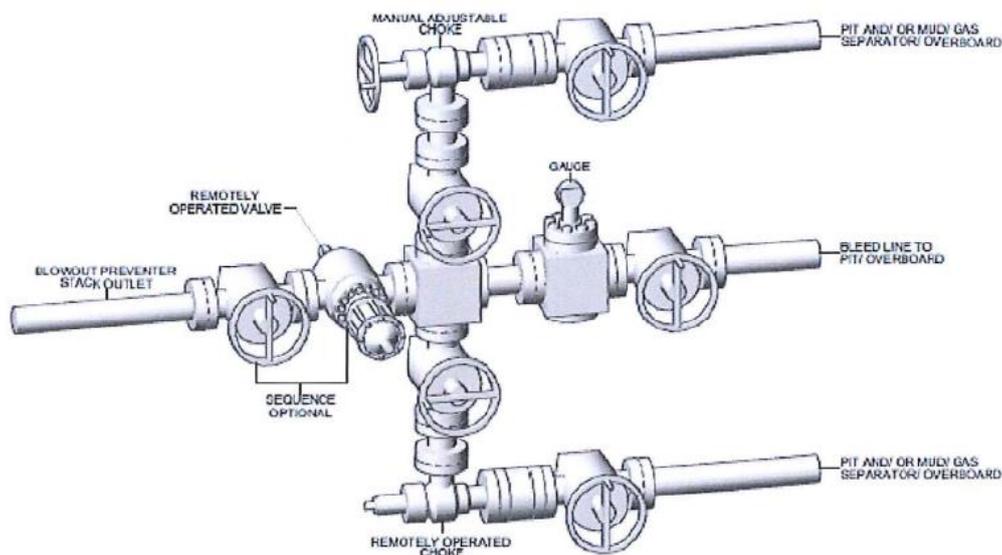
Example Choke Manifold Assembly for 5K Rated Working Pressure Service—Surface BOP Installations
